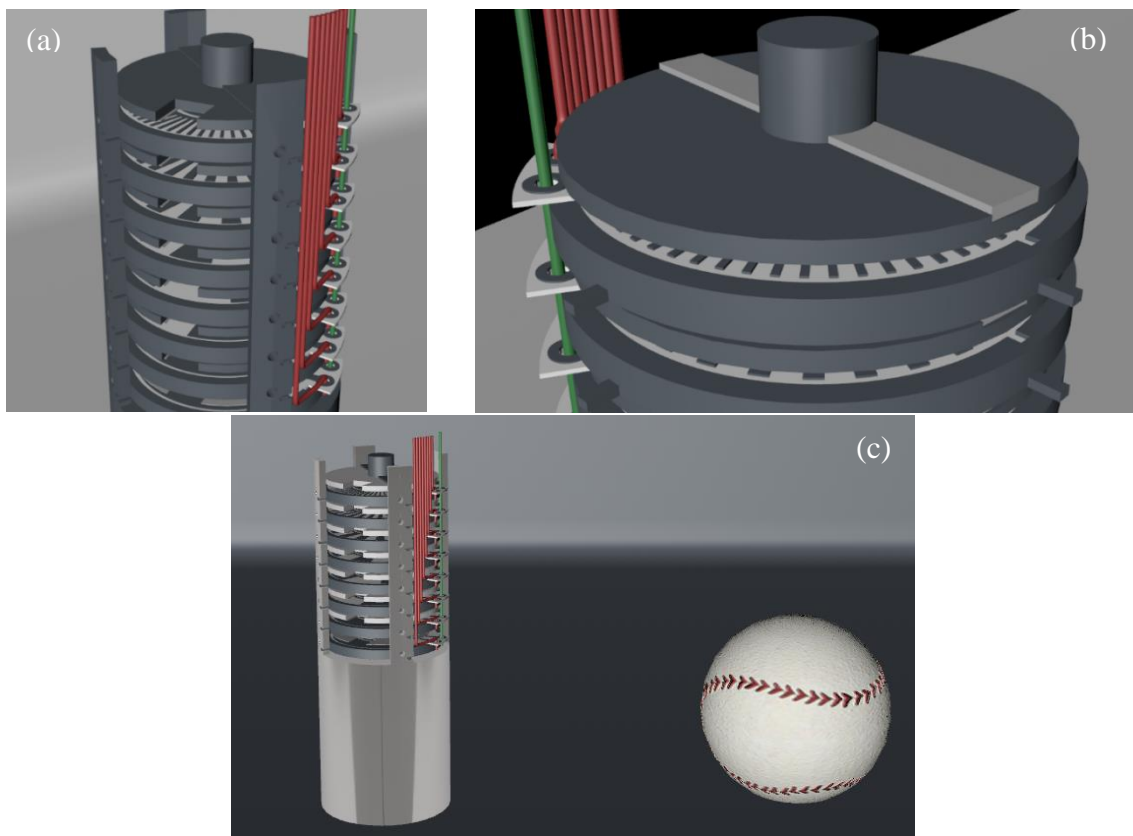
3D models of the all-digital sensor after assembly. (a) Detailed view of housing and pad holder. (b) Detailed view of shaft and pin holder. (c) Dimension comparison between the sensor and a baseball.
